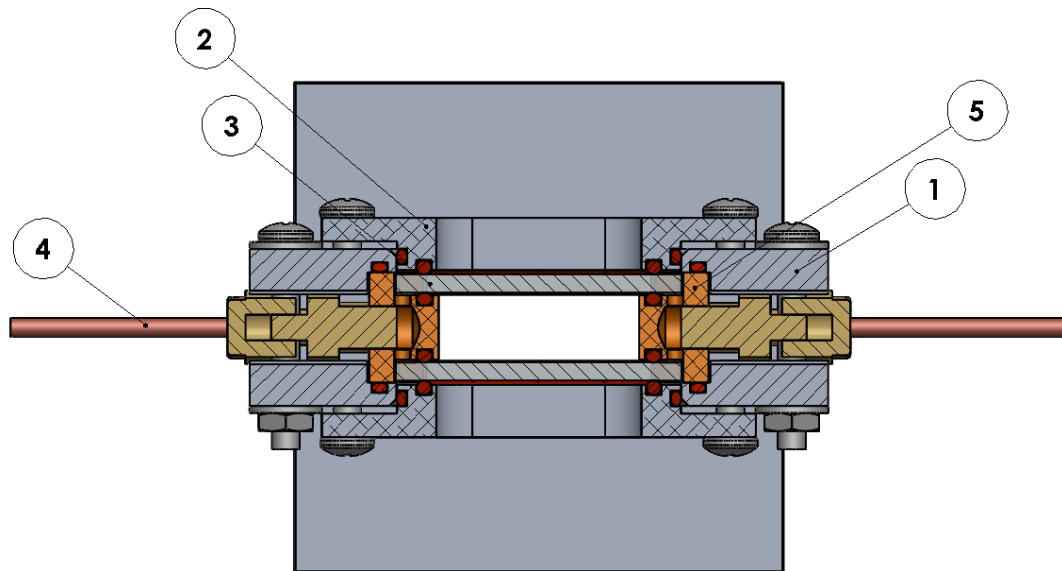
Section view of the test section; 1 - Main plate, 2 - Window flange, 3 - Float glass window, 4 - Pressure tape / wire lead, 5 - ULTEM spacer
